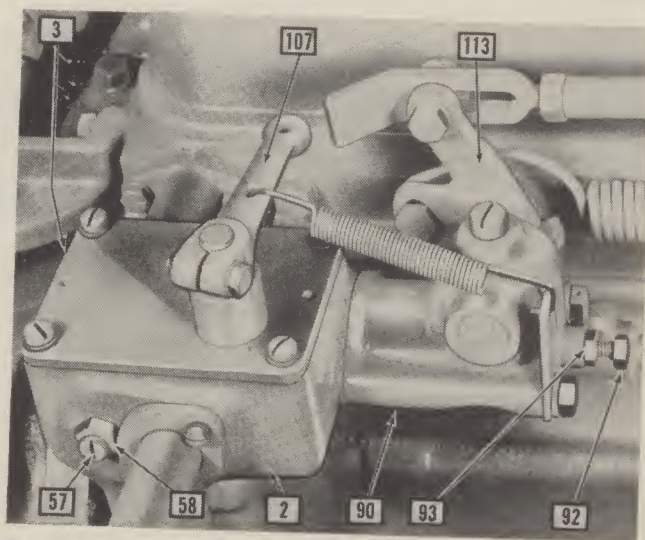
To adjust engine no-load idle speed to 450 rpm, place speed control lever (113) in idle position (forward) and rotate screw (92) in or out.
